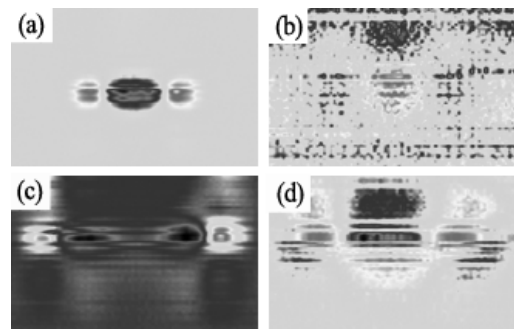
Fatigue crack inspection; (a) Surface crack with 9.75 mm length, (b) Far-side crack with 9.75 mm, (c) Surface crack with 22 mm length, (d) Far-side crack with 22 mm length
